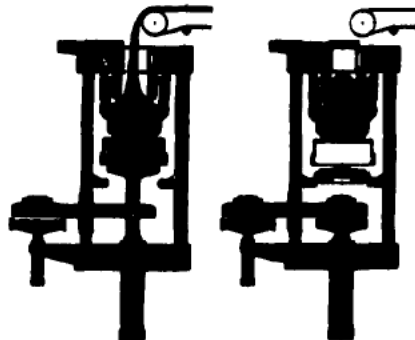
Schematic of the VACUPRESS moulding process - filling and flashed mould respectively (Kunkel-Wagner type)
